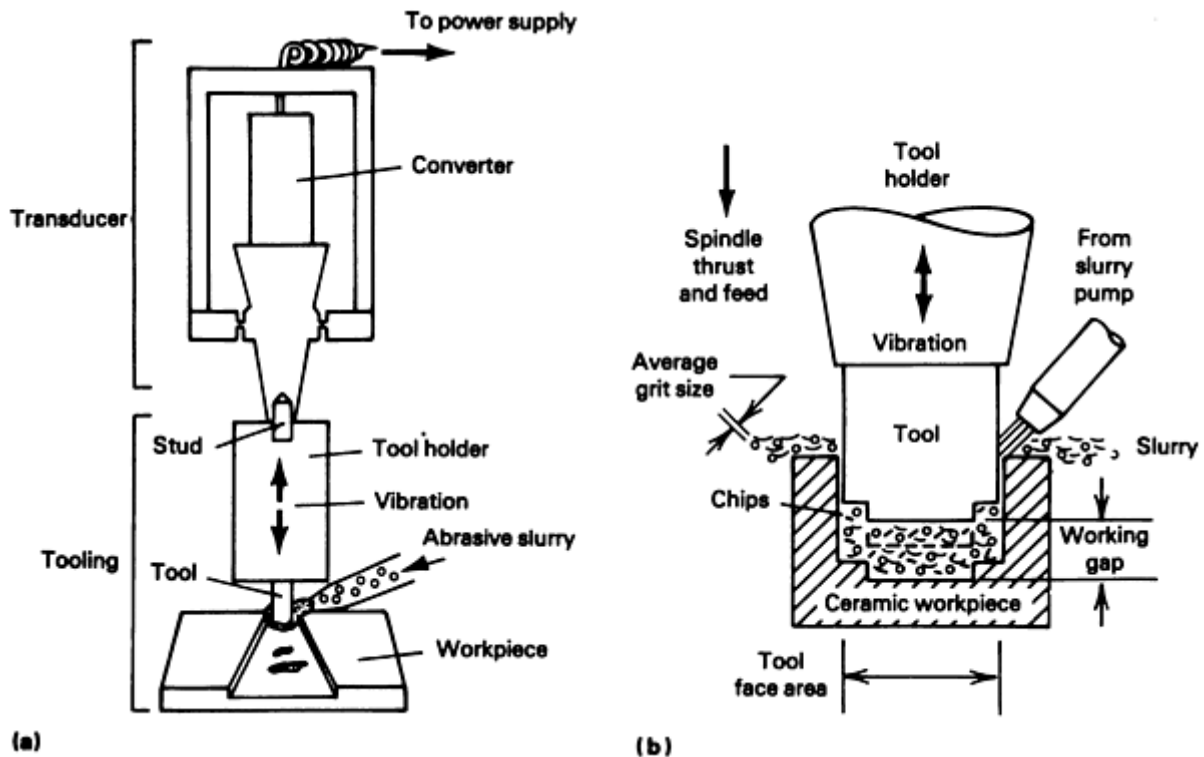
Schematic showing primary components of a typical ultrasonic machining installation. (a) Transducer assembly coupled to tooling assembly of unit. (b) Closeup view of tooling assembly being used to machine a ceramic
